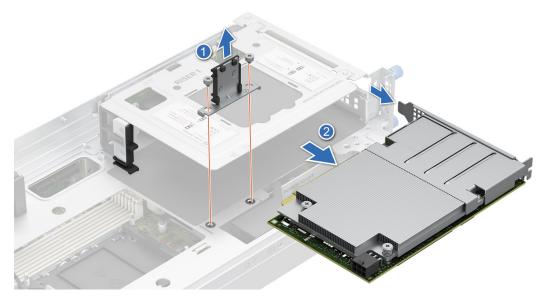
Removing the Dell 100GbE QSFP28 card from Riser 1
